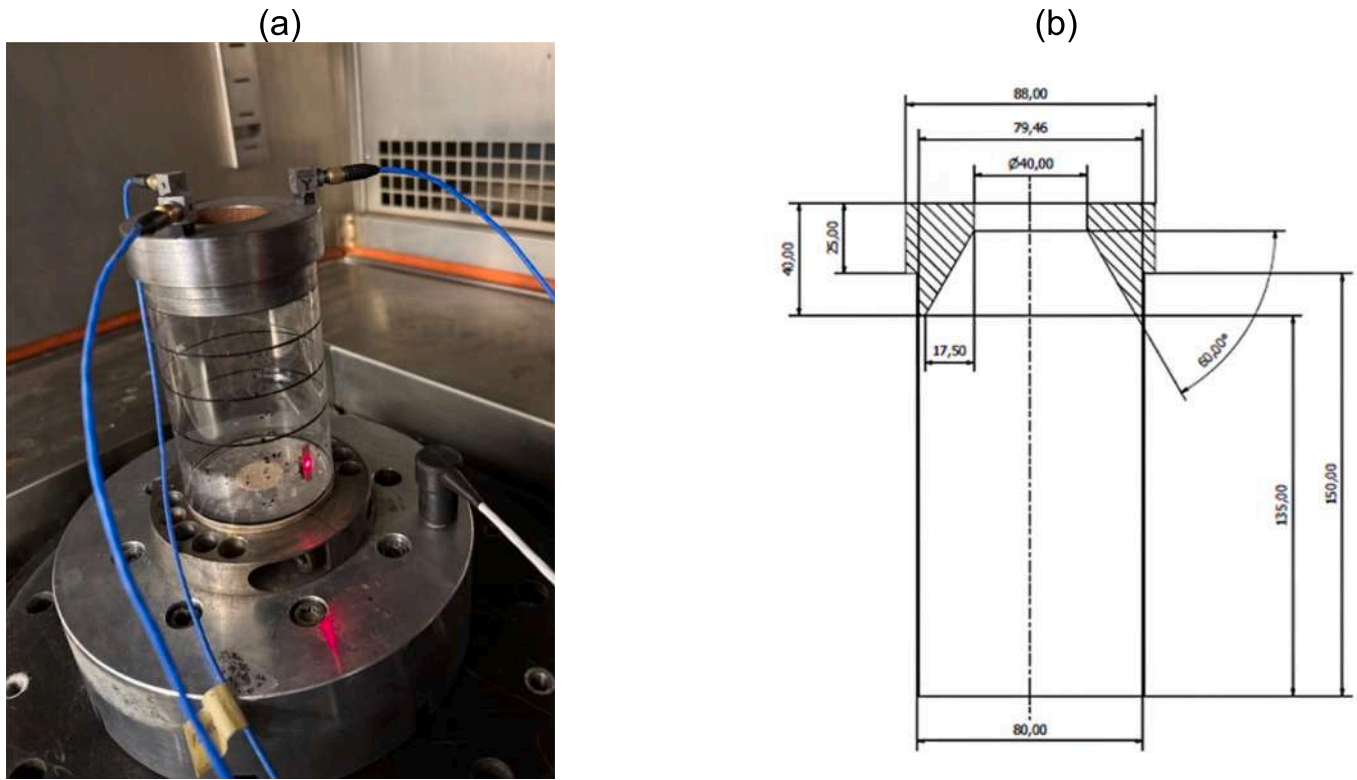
(a) Instrumented test specimen shell, and (b) shell-disk assembly technical drawing.
